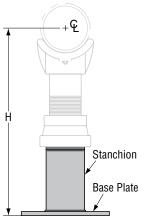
, Type T Square Cut Threaded End for use with Figure 264 or 265 Adjustable Pipe Saddle Support
